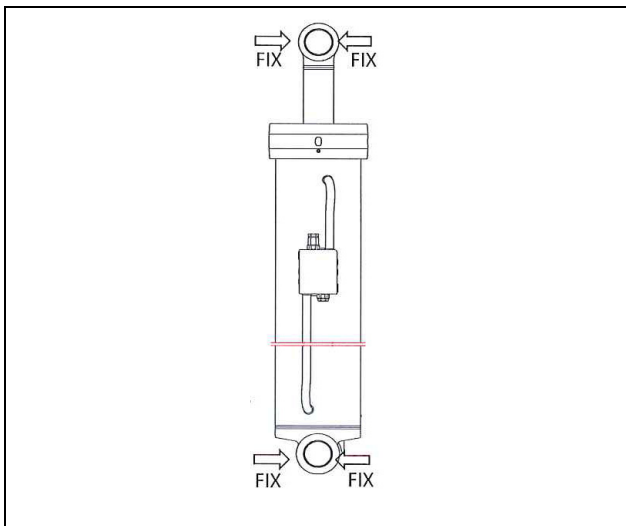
Fixing the Cylinder (Tower Lift Cylinder)
